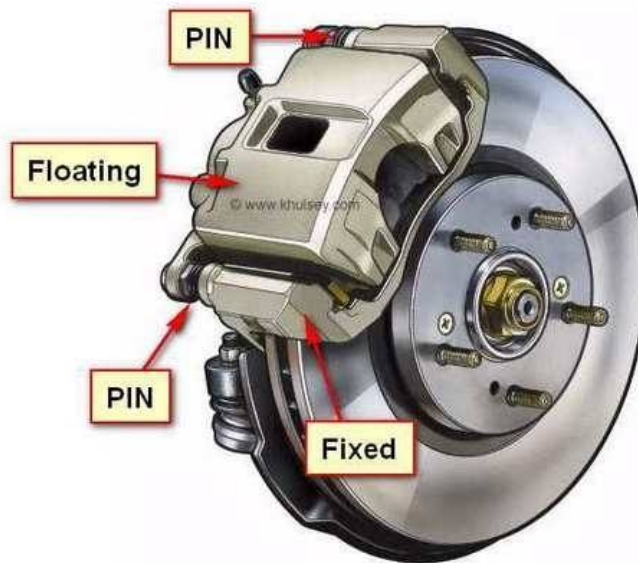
Diagram of Floating Caliper with solid, ventilated brake rotor [51]
